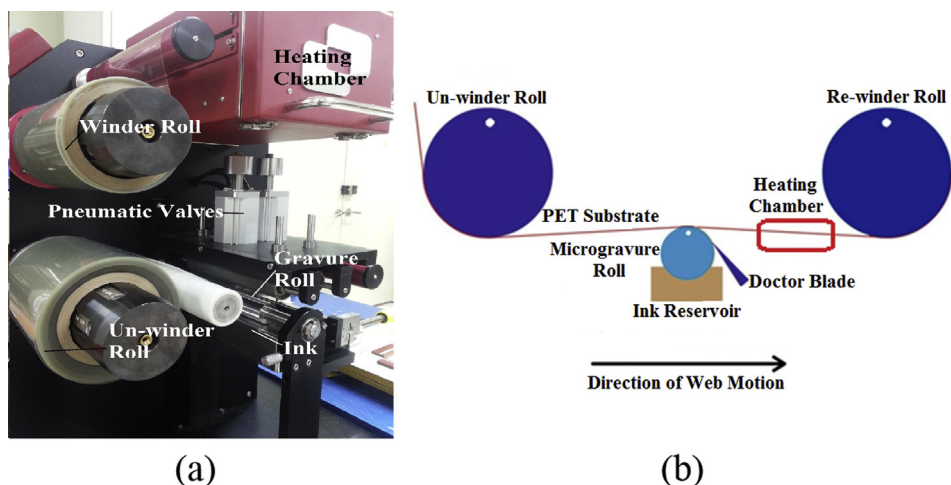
Photograph of the micro-gravure roll-to-roll printing system (a), schematic and working principle of the micro-gravure roll-to-roll printing system (b).
